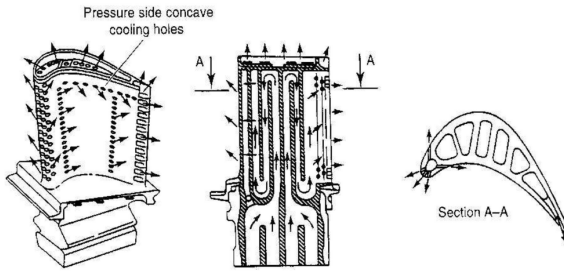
Example of trailing edge cooling schemes in a rotor blade
